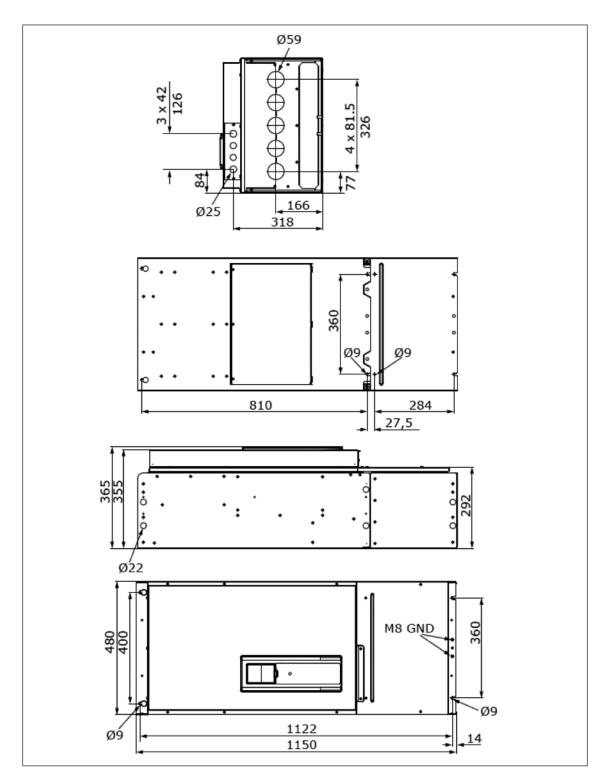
The dimensions of the AC drive, MR9, IP21 and IP54
